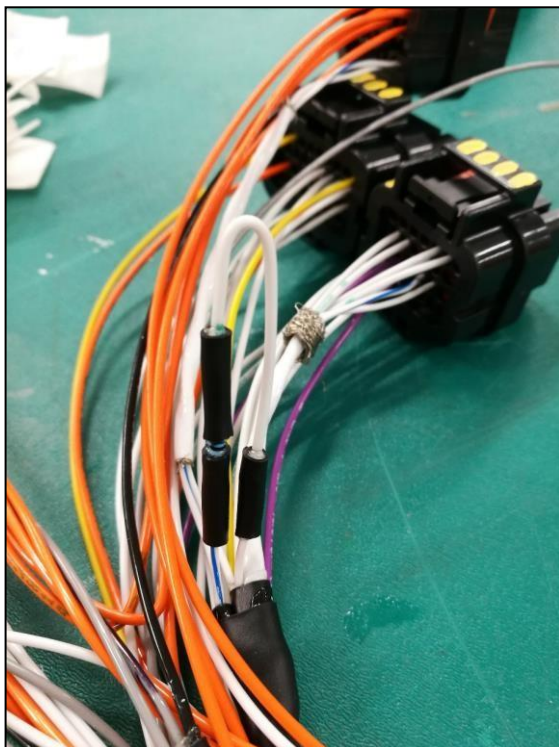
Glue Lined Heatshrink Over Both Mechanical Crimps
